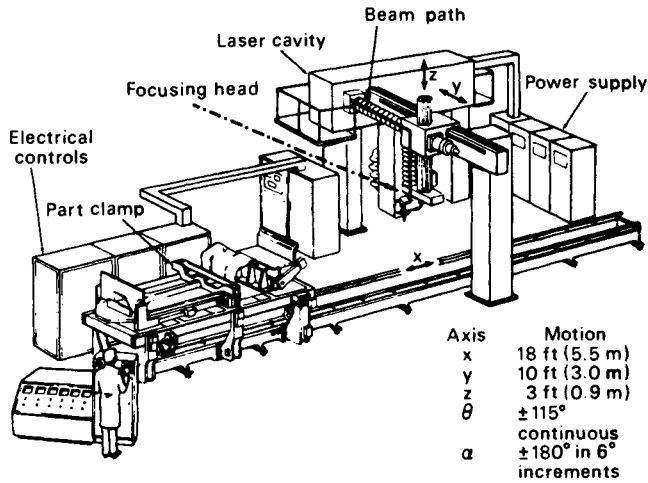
Schematic of laser underbody welding system. (Supplied by Hamilton-Standard for Ford Motor Co.)⁽¹⁴⁰⁾
